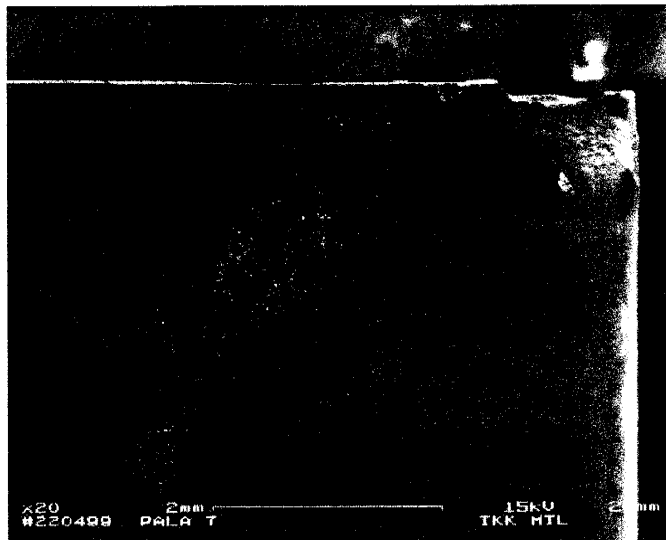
The flank edge of solid carbide insert after machining time, $T = 4$ min in turning of X5 CrMnN 18 18 trial material, 0.91 wt.% N. Cutting speed, $v_c = 65$ m/min.
